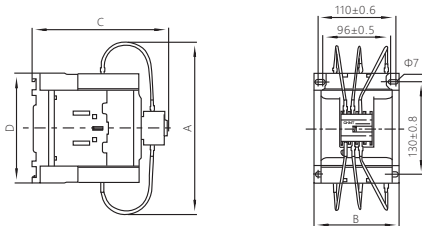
Outline and installation dimensions of CJ19-115~170 contactors
